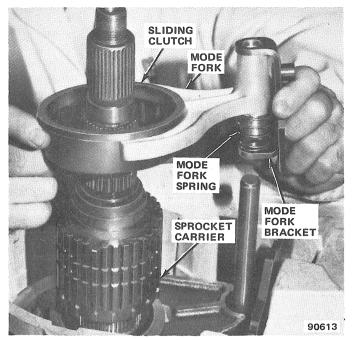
D-18 Mode Fork, Spring, Bracket and Sliding Clutch Removal/Installation
